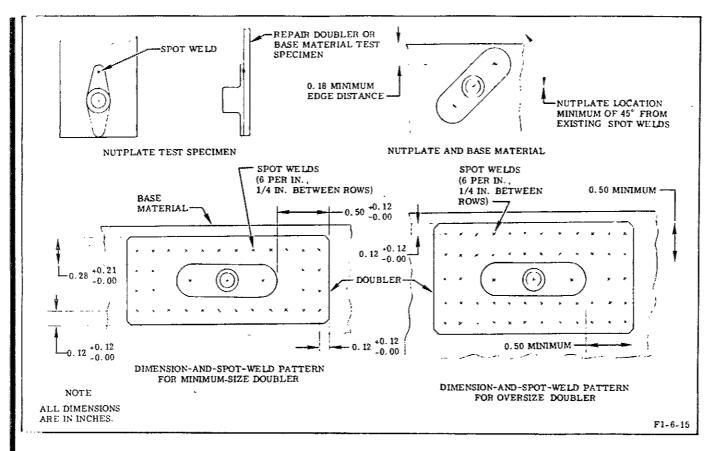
Nutplate Replacement and Spot Welding
